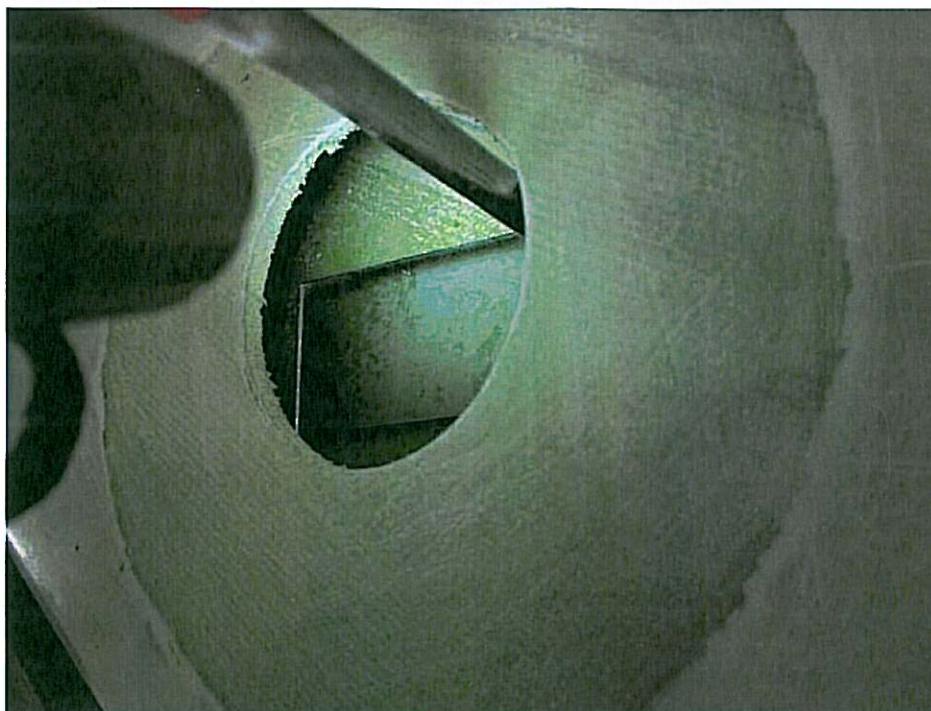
Degreasing and grinding of surfaces inside of the wing.
